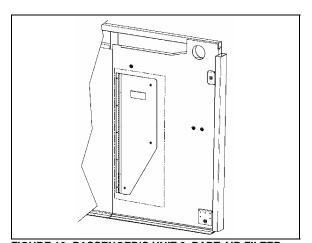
PASSENGER'S UNIT 2-PART AIR FILTER ACCESS PANEL
